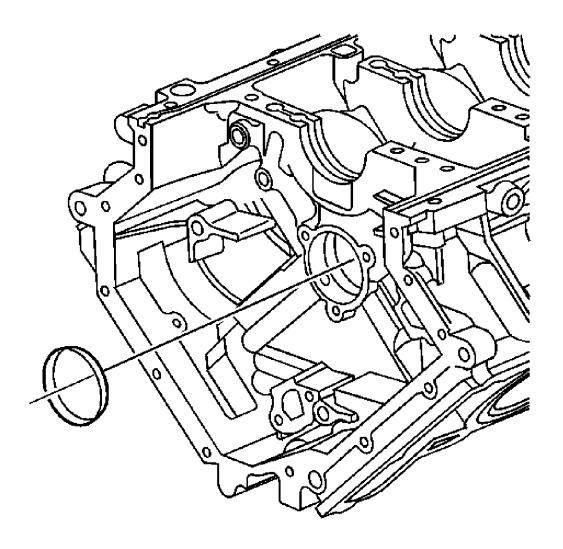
View Of Camshaft Intermediate Shaft Plug Courtesy of GENERAL MOTORS CORP.
